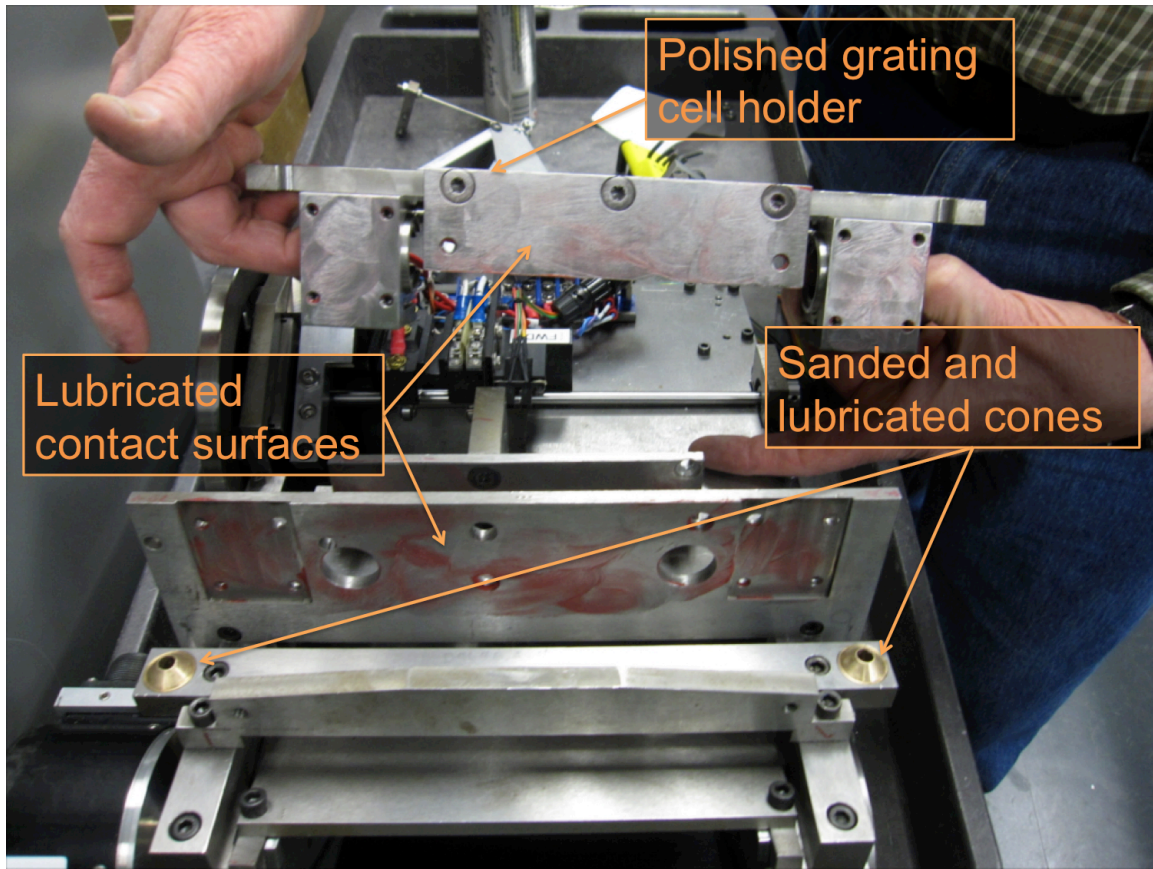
Contact surfaces and guide cones were lubricated to facilitate the cell repositioning after unclamping. Cones were sanded and flat metallic contact surfaces were polished before lubrication.
